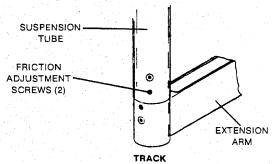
EXTENSION ARM FRICTION ADJUSTMENT
